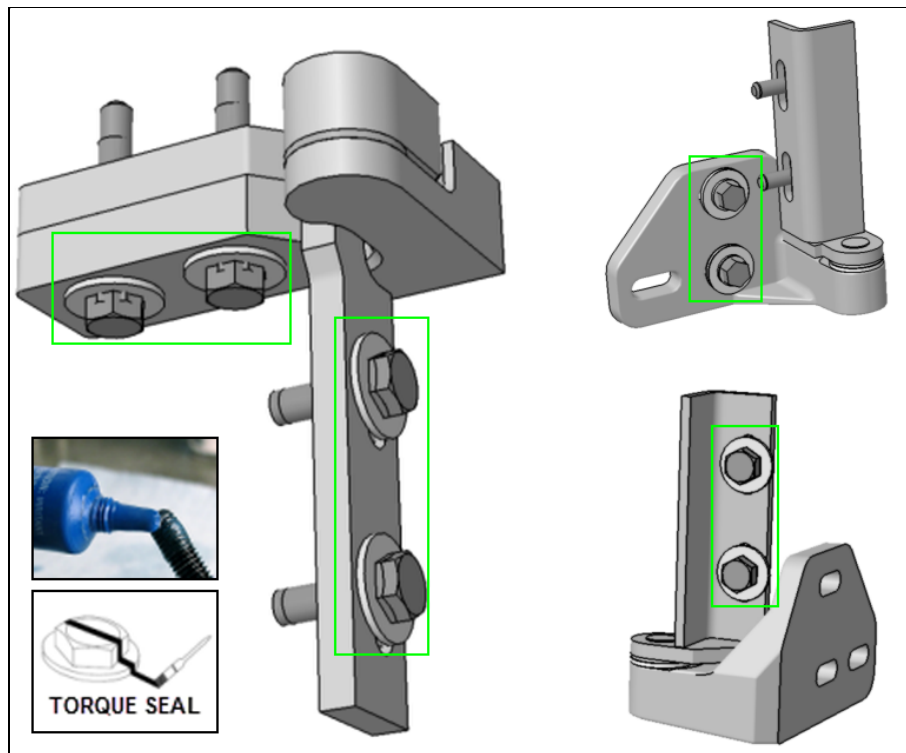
RE-APPLY THREAD LOCKER AS NECESSARY AND APPLY TORQUE STRIPE
